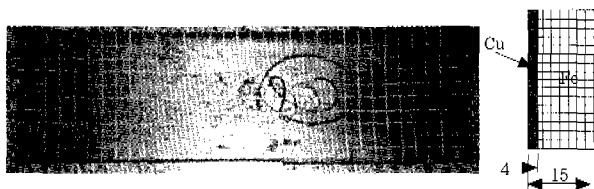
Apparent view of explosively bonded Fe-NBrass specimen
